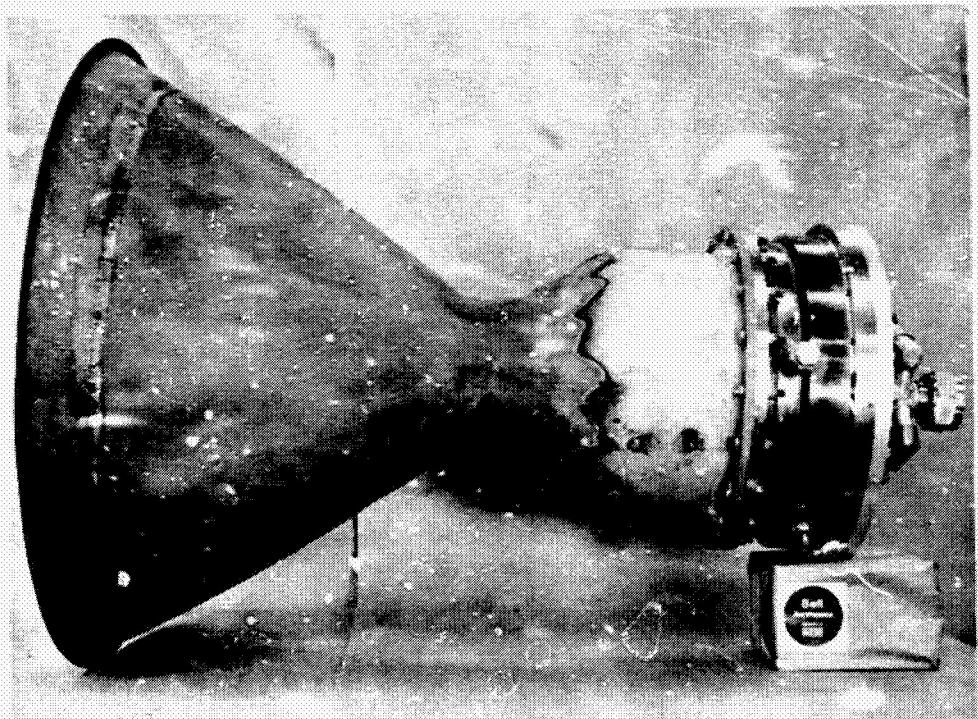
COLUMBIUM THRUST CHAMBER ASSEMBLY
